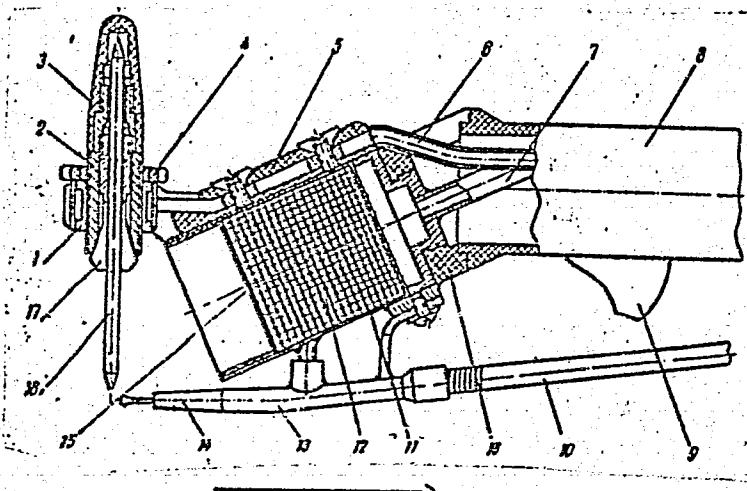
Gun for argon shielded arc welding of titanium
